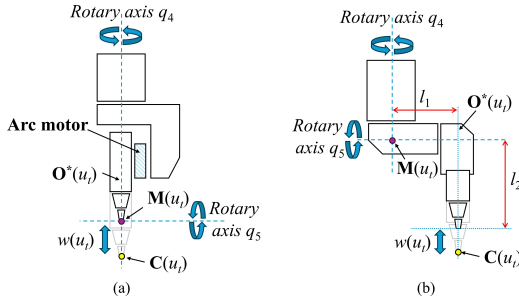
Mechanical structure of 3D laser cutting heads. (a) zero-offset head on EFORT machine; (b) conventional head on traditional 3D laser cutting machines.
